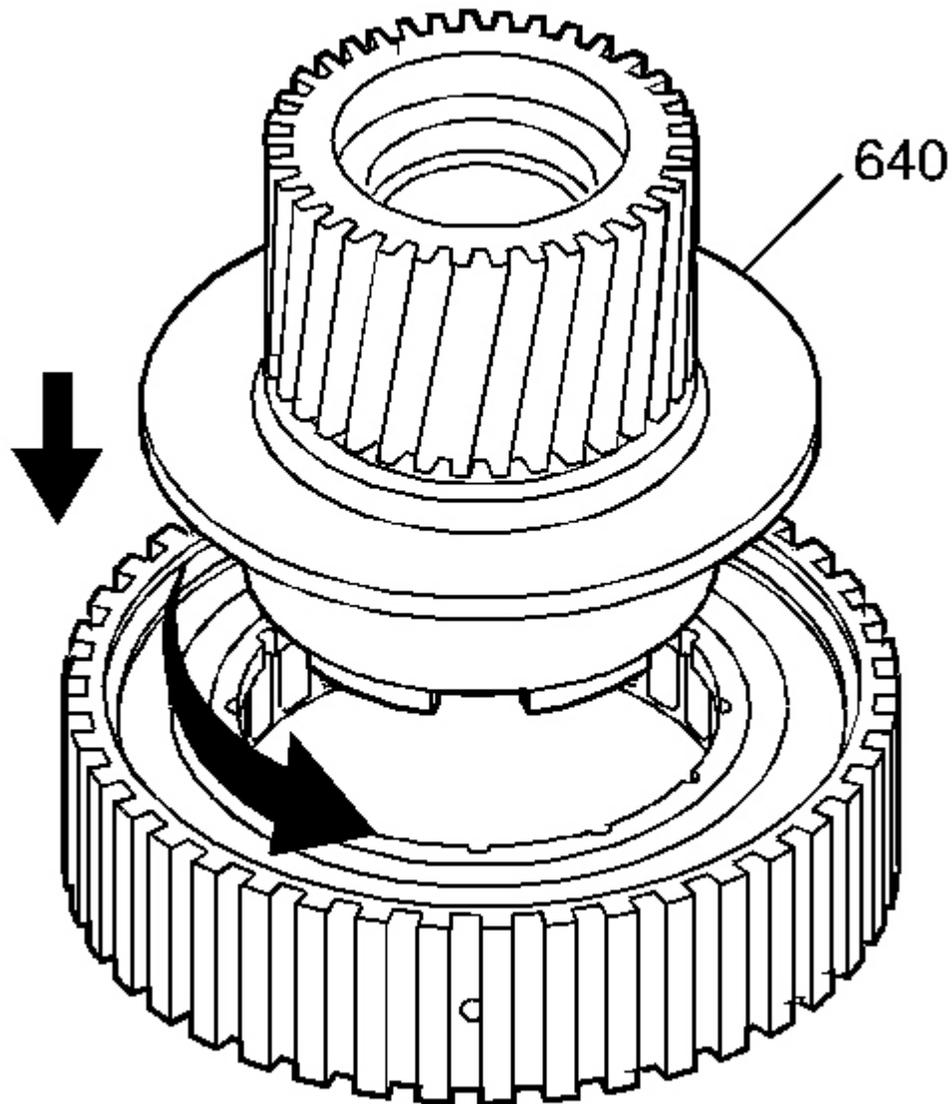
Inspecting Forward Sprag Clutch Inner Race & Input Sun Gear Assembly
